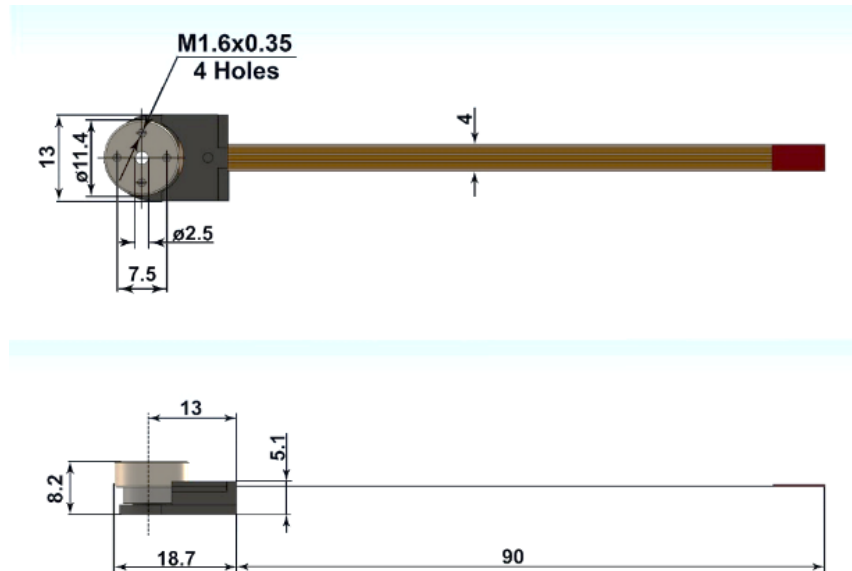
ROMO Rotary Piezo actuator without factory-fitted encoder. Dimensions (mm)
